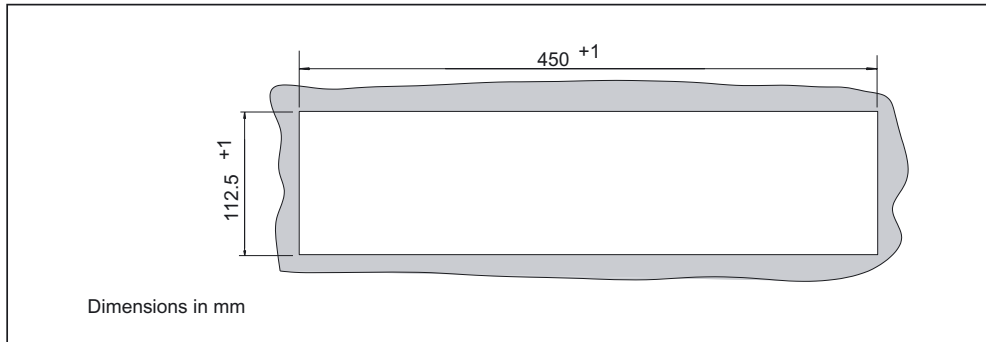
Panel cutout for CNC full keyboard KB 483C (plate thickness 1.5 - 6.0 mm)
